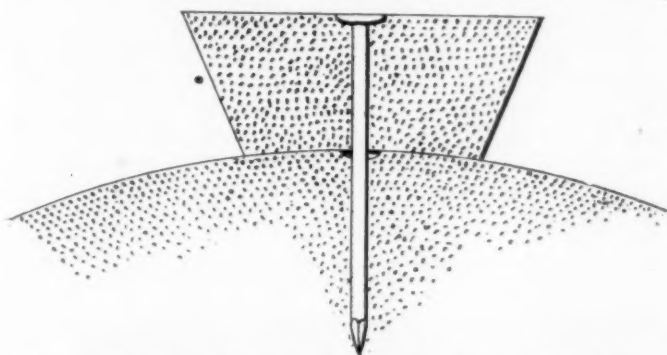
BAKED ANCHOR CORE FOR PRODUCING ANCHOR HOLE IN BEARING.
